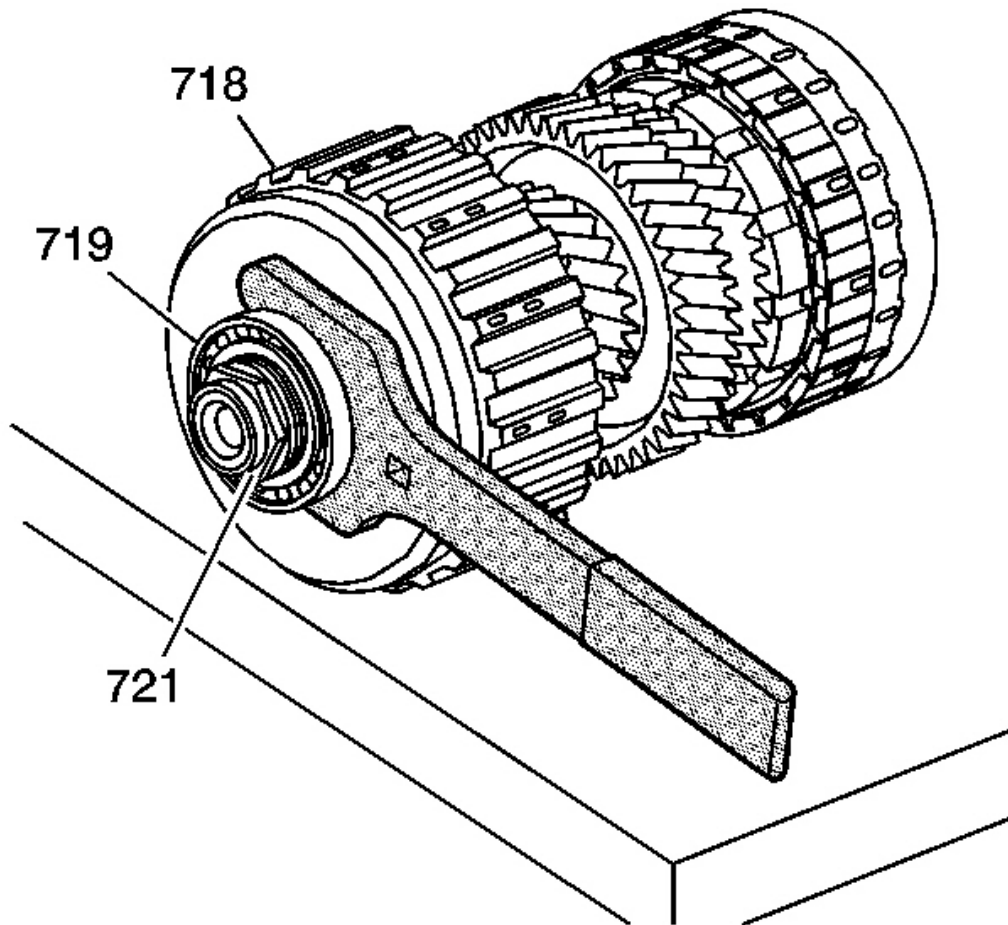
Tightening The 1st/2nd Clutch Shaft Retainer Nut Using A Torque Wrench
